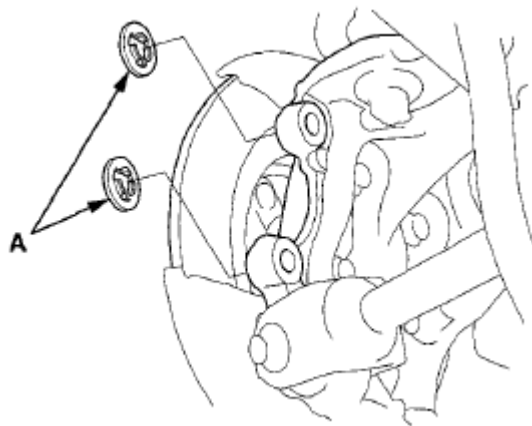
Identifying Brake Caliper Bracket And Knuckle Washers
